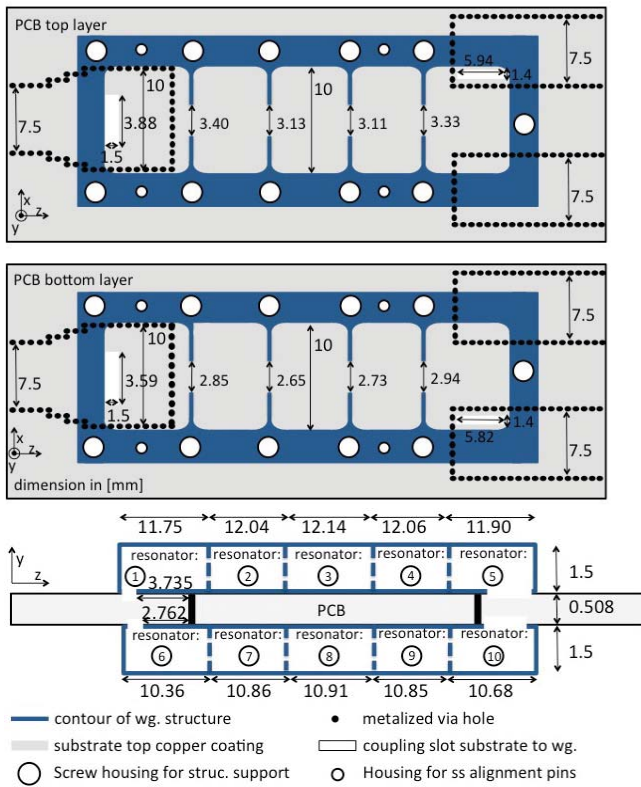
Top and side views of the double-layer SMW diplexer (Design 2). All dimensions are in millimeters.
